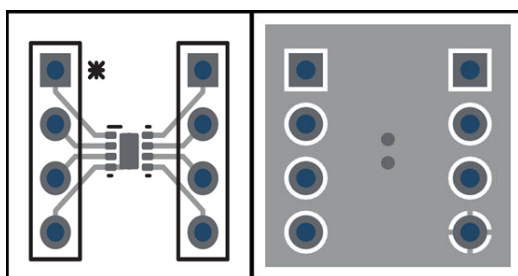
DPW package top layer (left) and bottom layer (right) PCB layout
